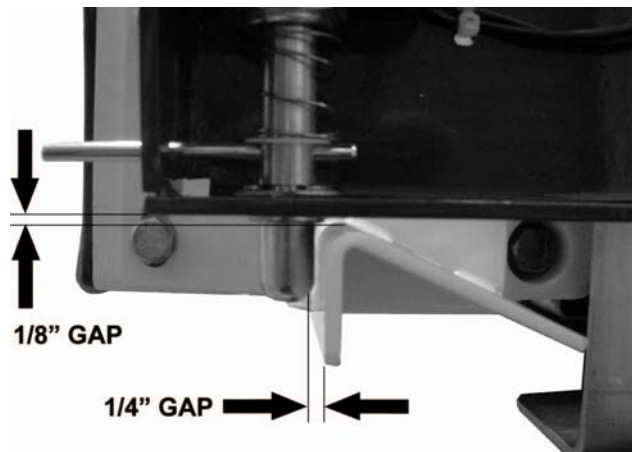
STRIKER PLATE/STOW-LOCK ADJUSTMENT
